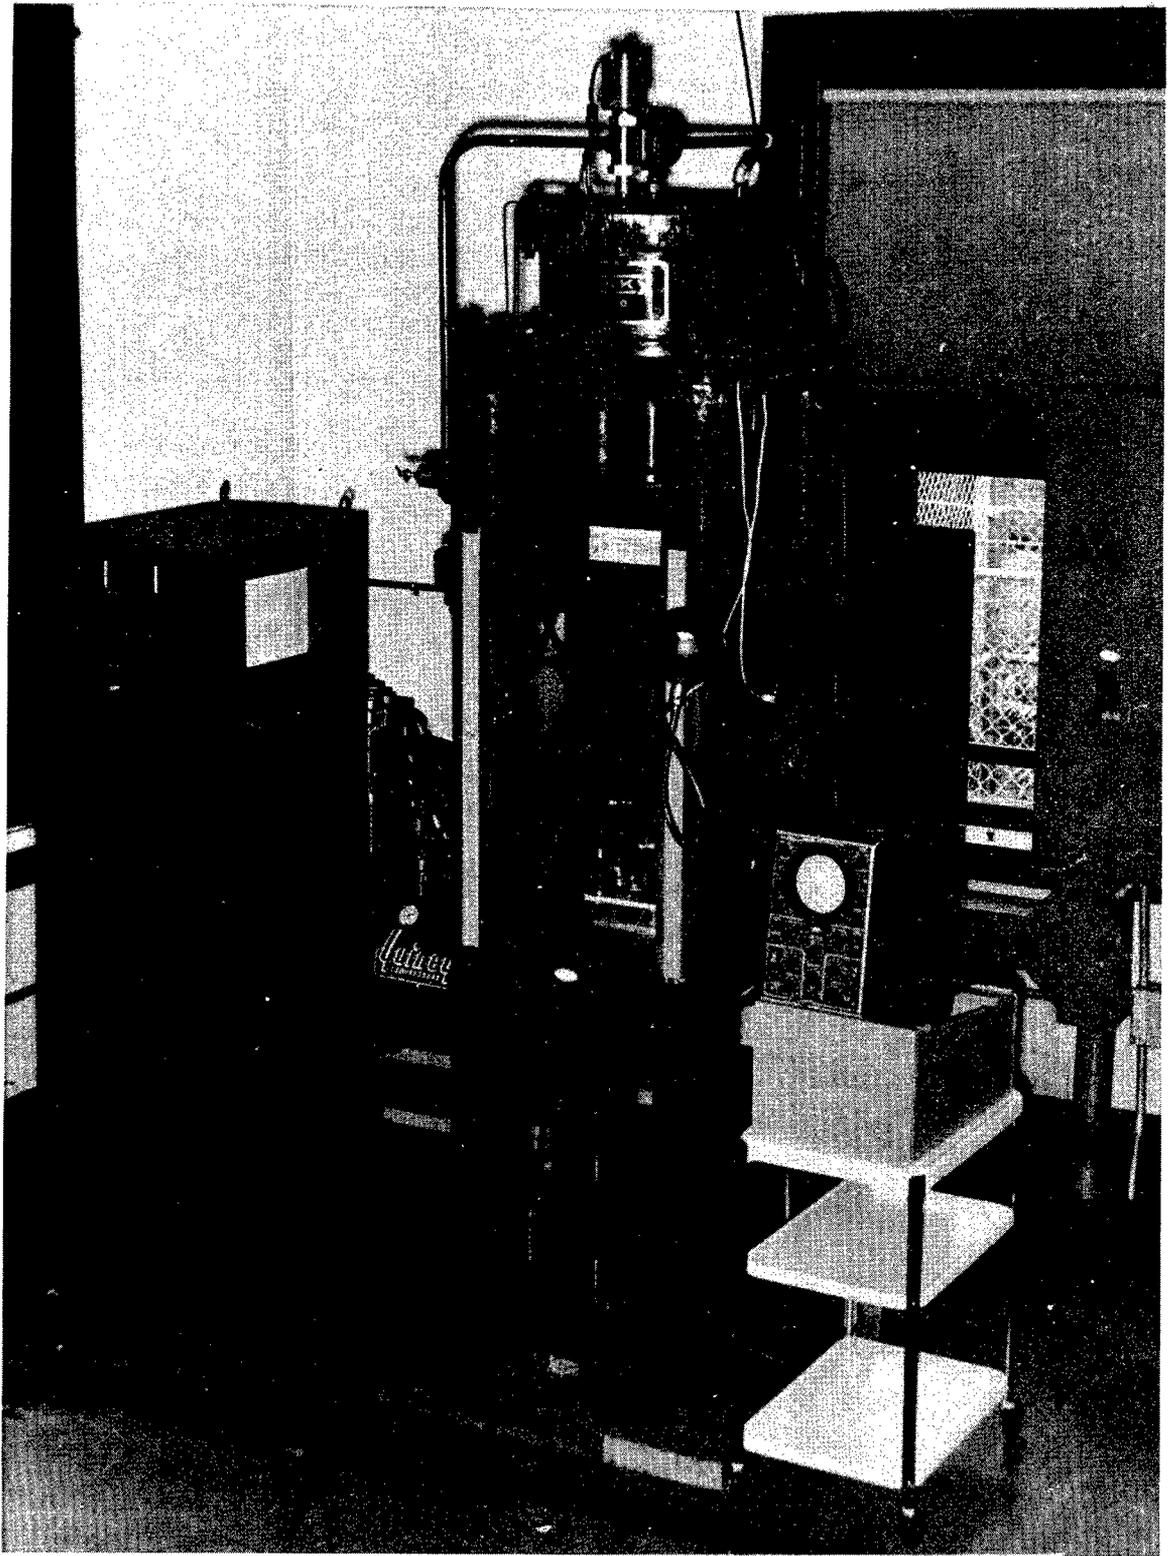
Flash Sintering Machine and Auxiliary Equipment
